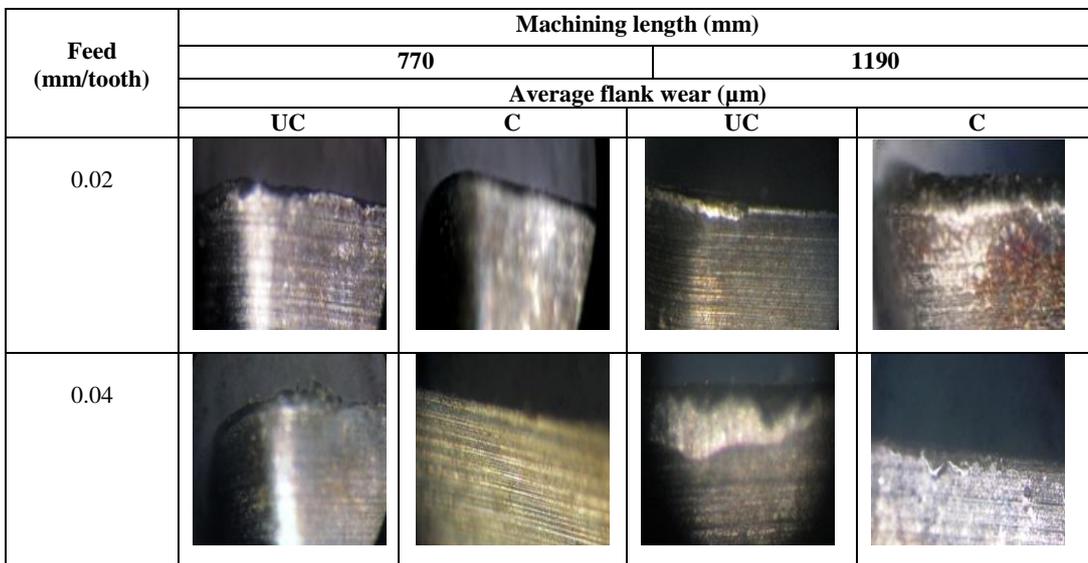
Flank wear pattern at cutting speed of 100 m/min.
